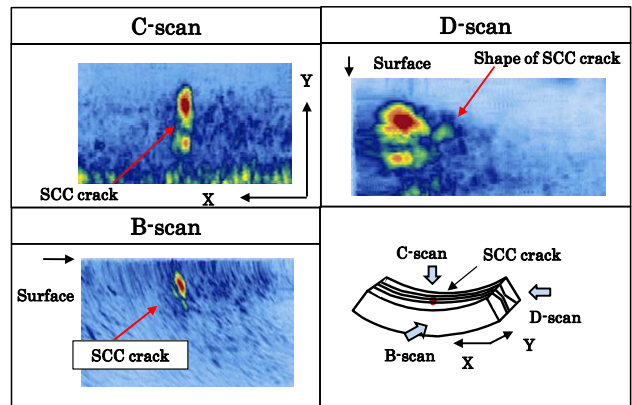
Inspection images of DMW specimen with axial SCC crack by phased array UT
